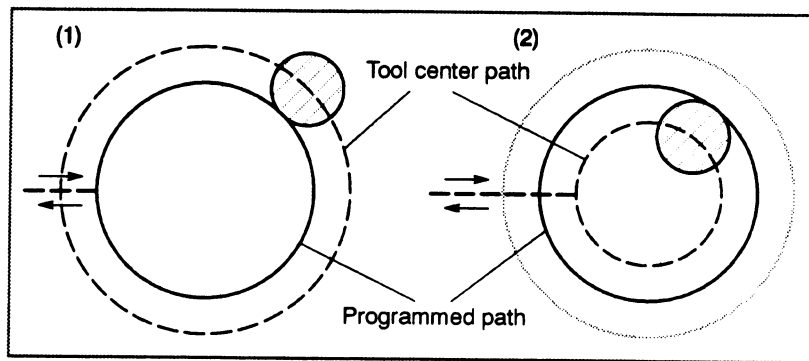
(d) Tool Center Paths when Positive and Negative Cutter Compensation Values are Specified
